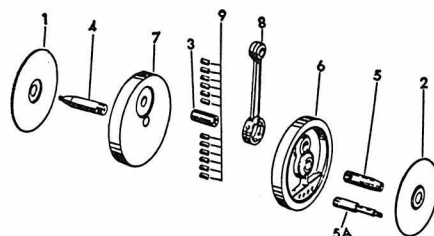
Exploded view of the flywheels, crankshaft and rod assembly.
